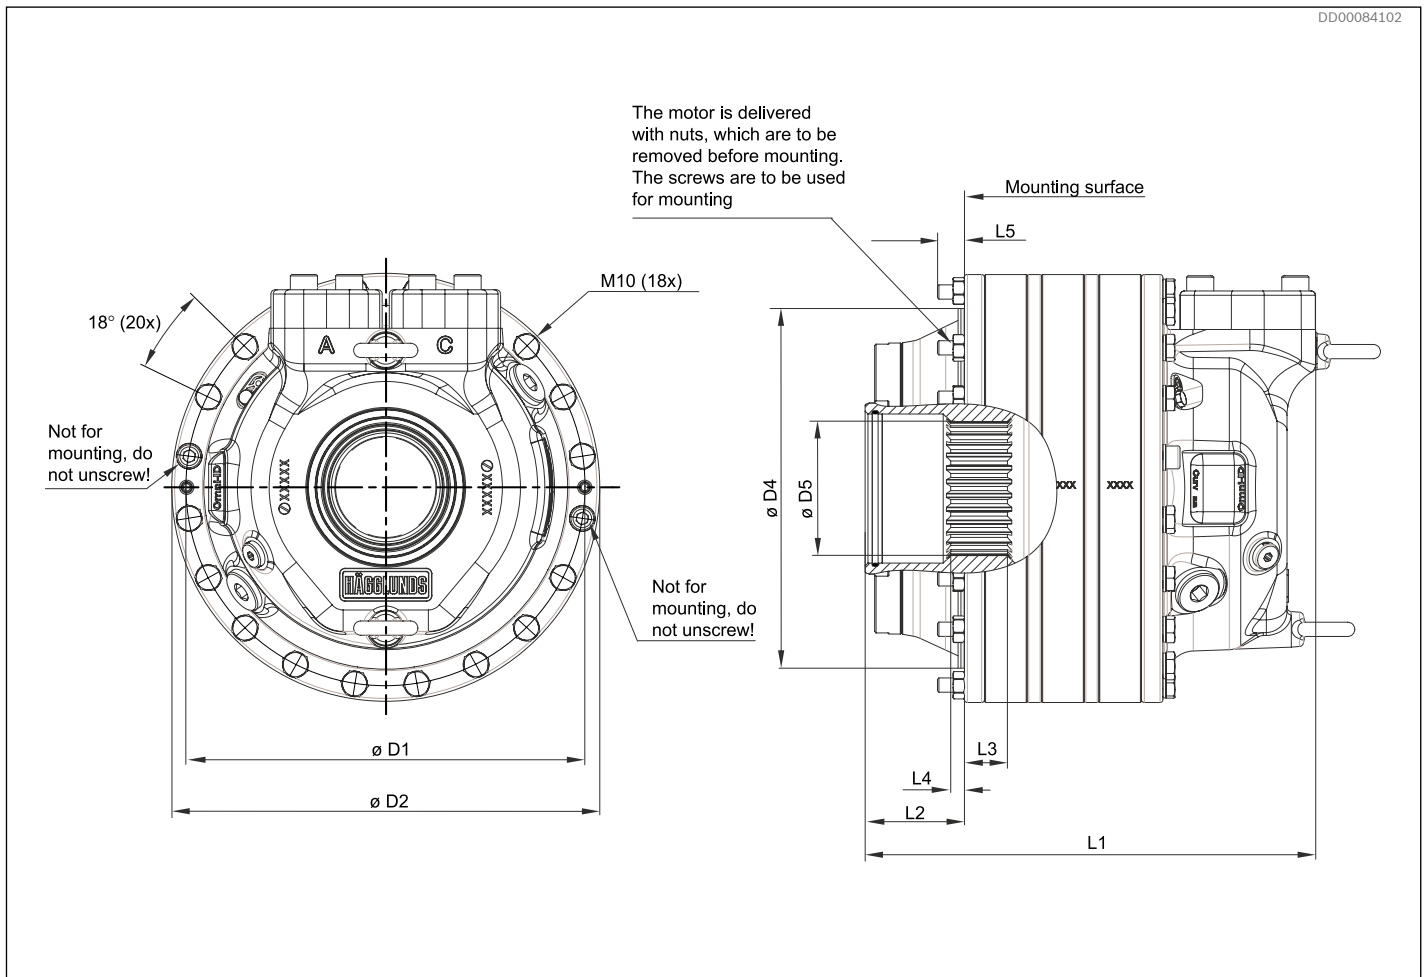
CAb 30 28 F and CAb 30 30 F (front flange)
